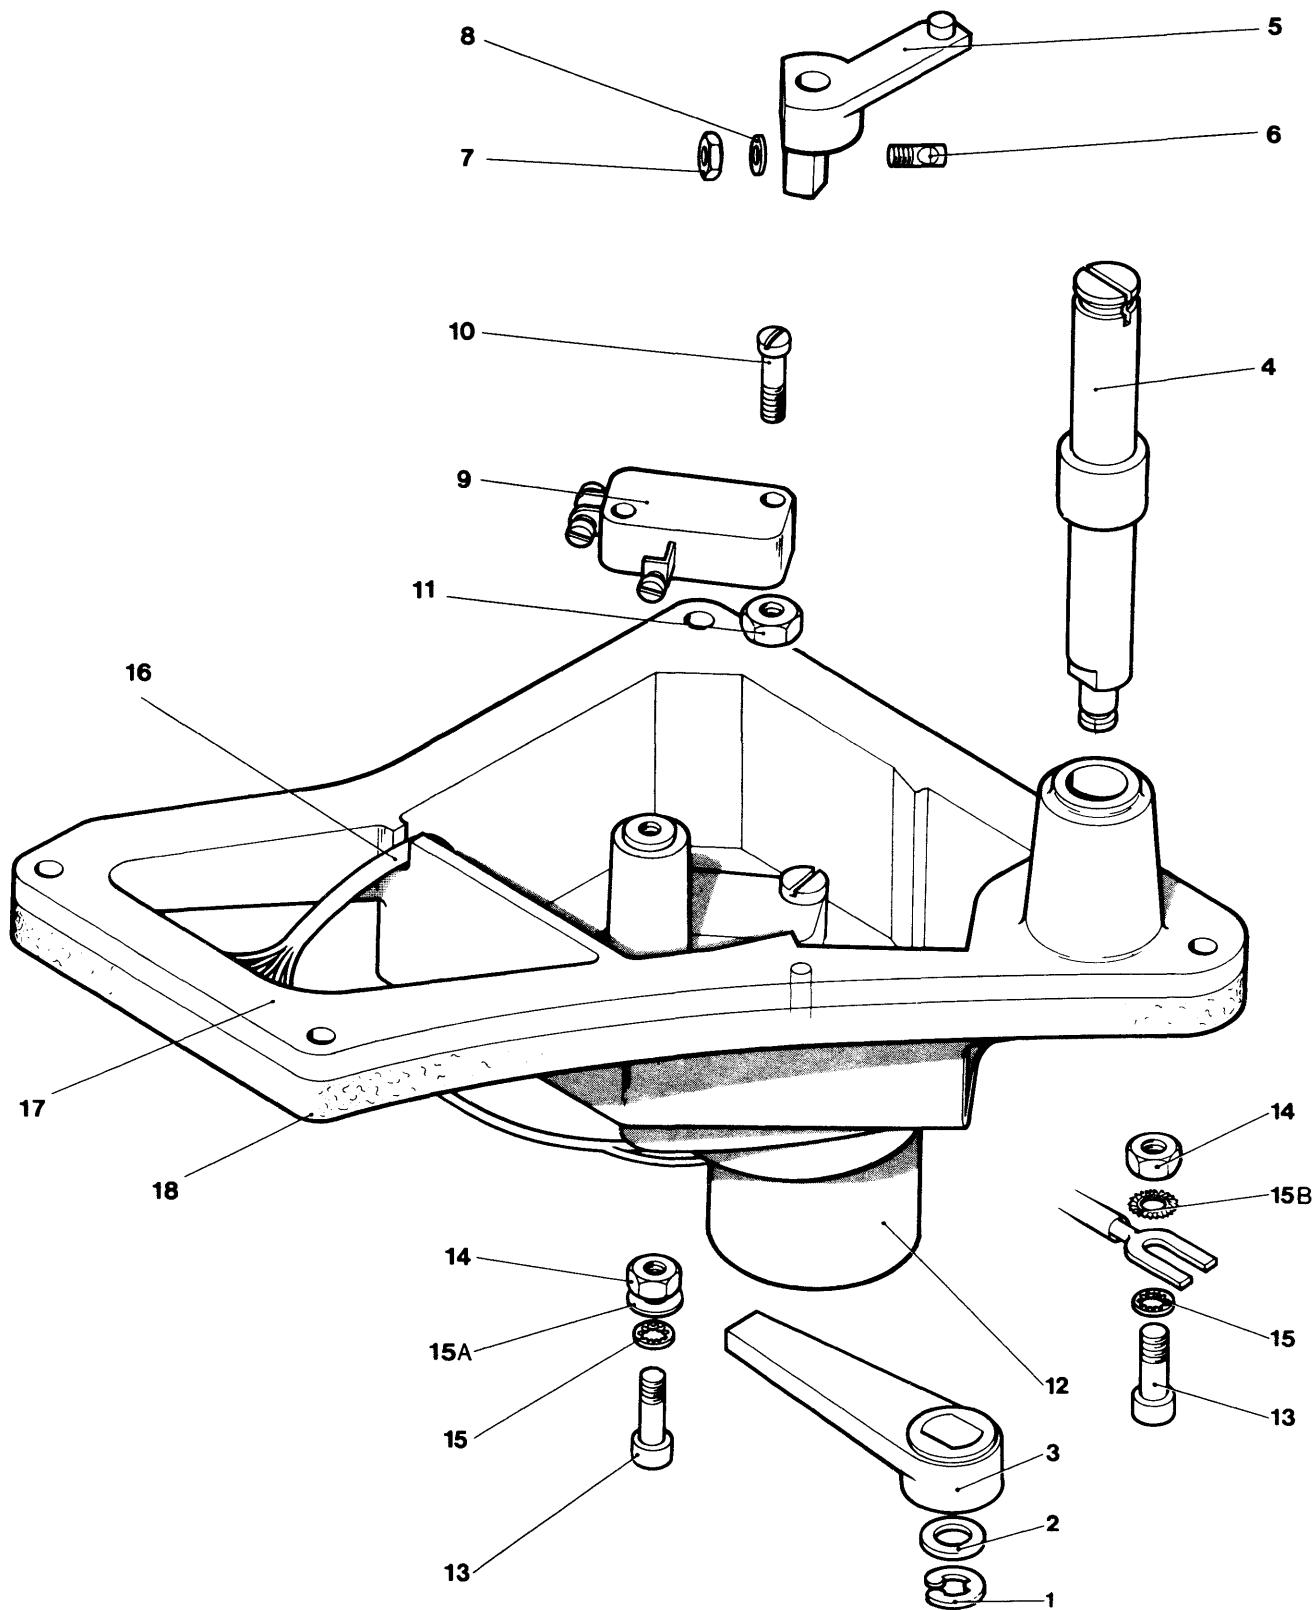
BRUSH DRIVE ASSEMBLY - 50HZ
